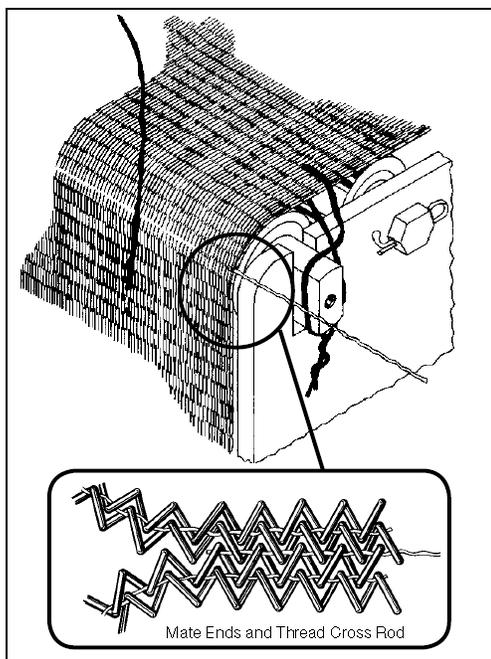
Mate Belt Ends Together and Thread Cross Rod
